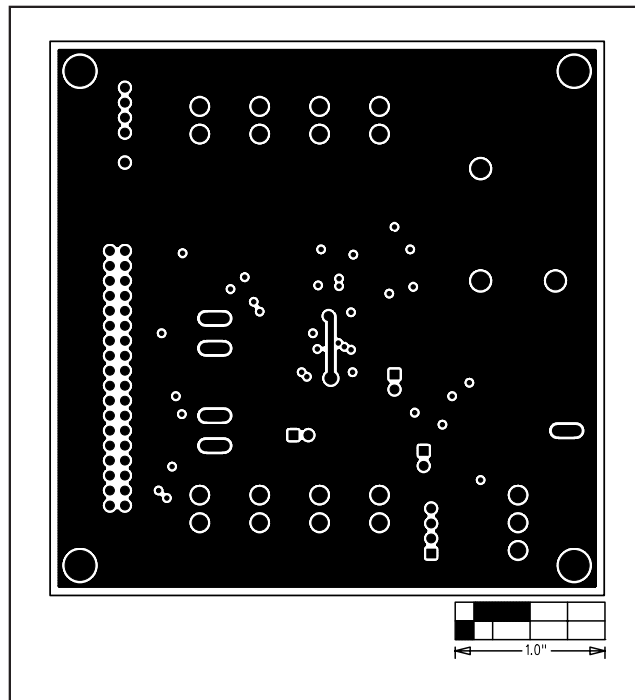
MAX13036 EV Kit PCB Layout—Layer 2 (GND)
